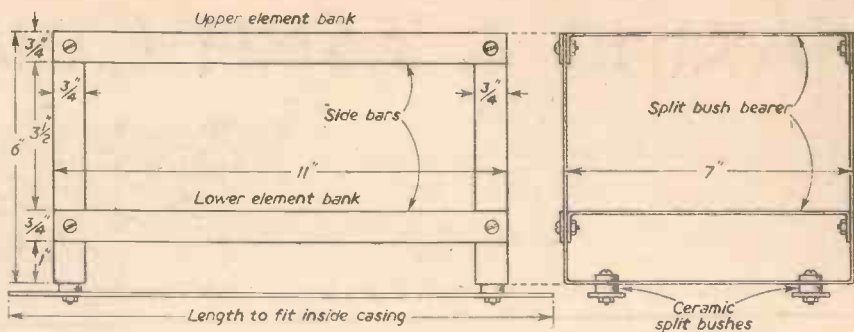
Dimensions of element carrier and element ready for fitting.
